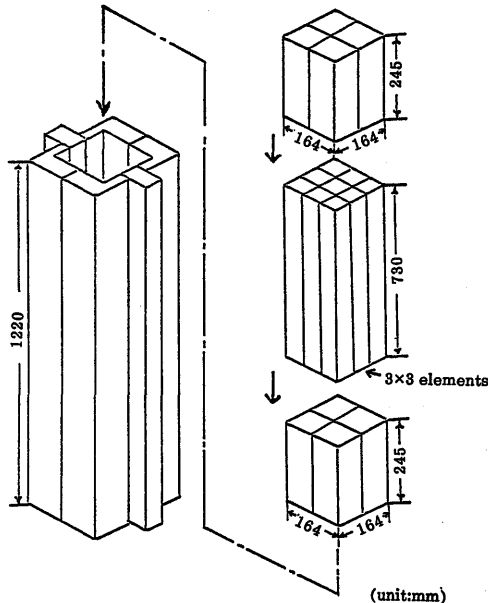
Enlarged central stringer and Natural Uranium assembly (3x3 elements)
